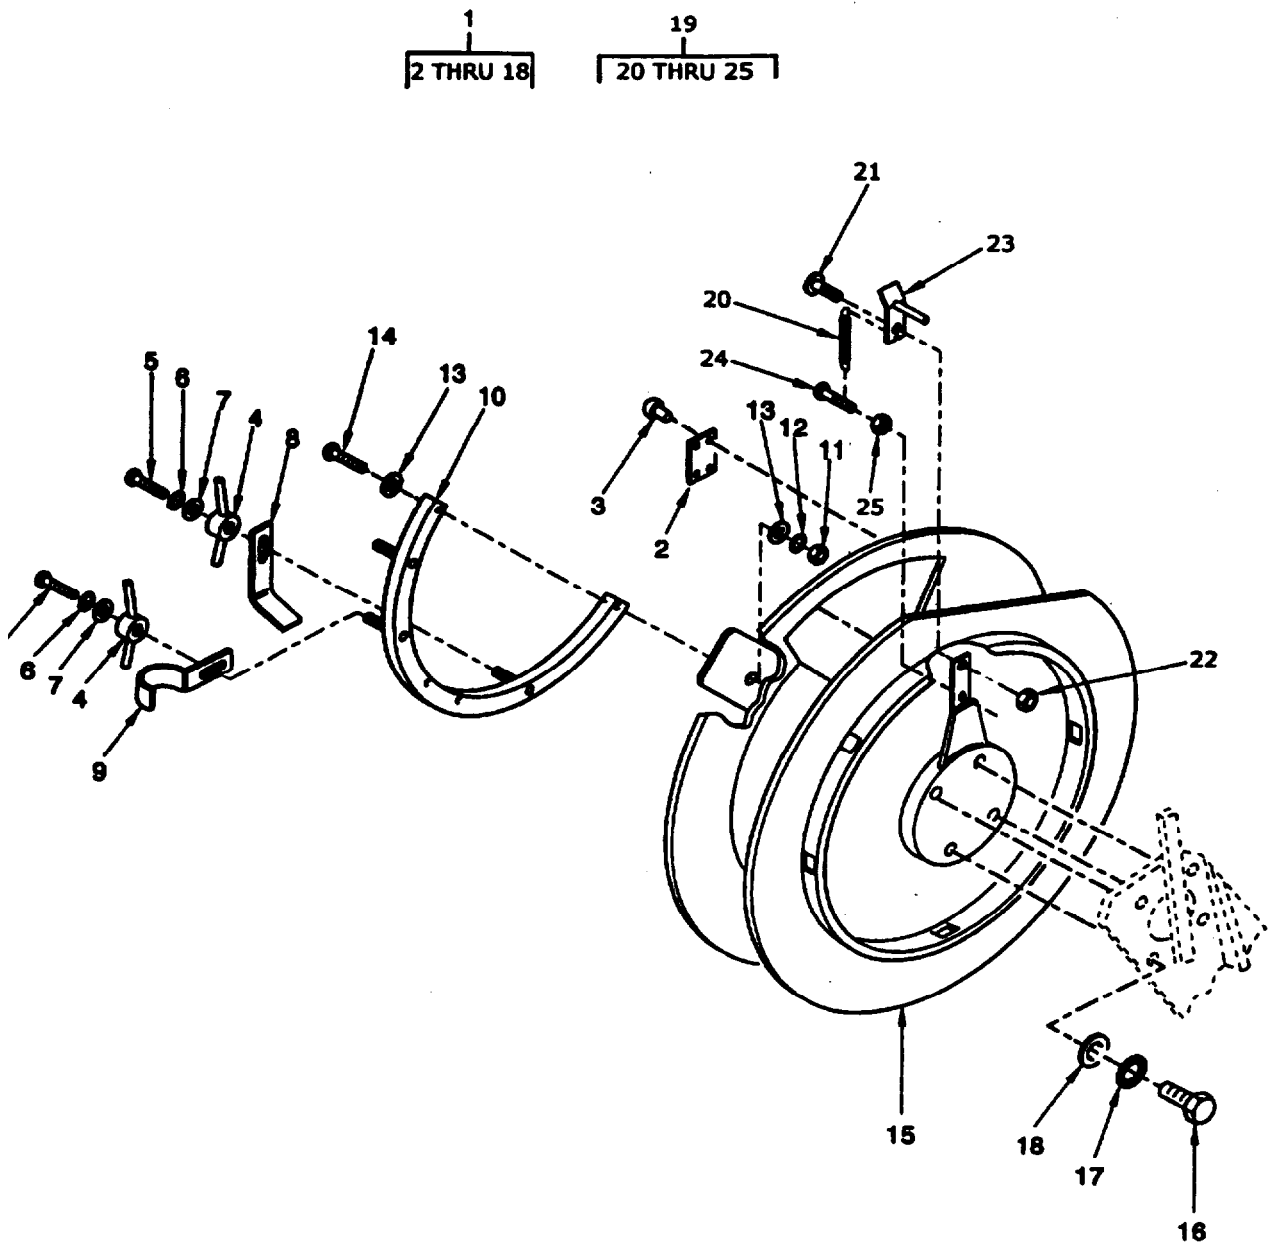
Cable Drum Assembly (ECS - Power Cable Set)
